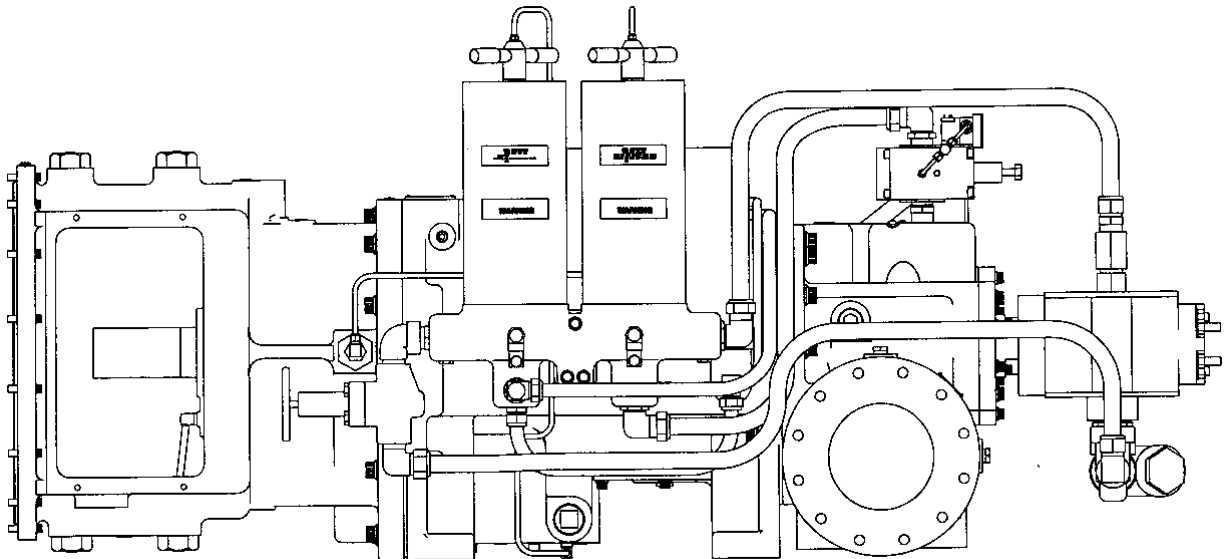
INTEGRAL OIL SYSTEM AND BELL HOUSING MOUNTING - DISCHARGE SIDE VIEW
